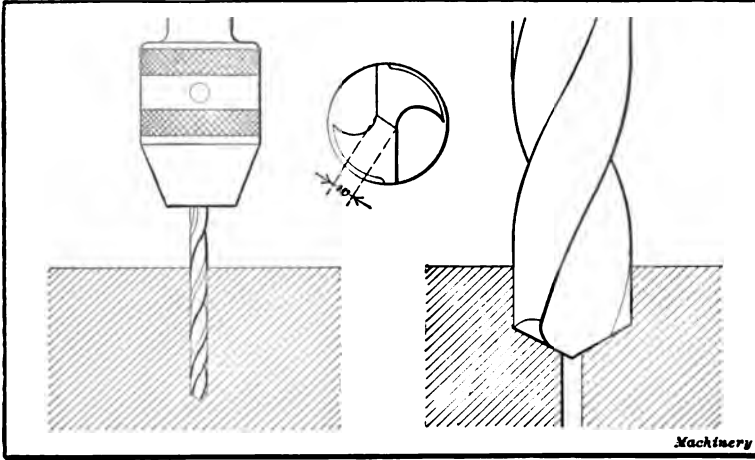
Pressure for Feeding Large Drill can be reduced by Drilling Small "Lead Hole"
